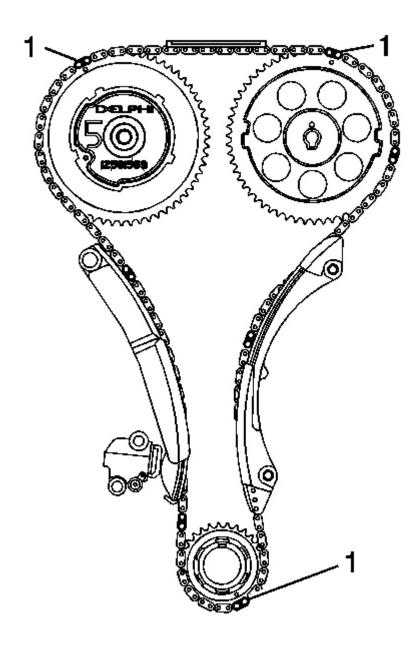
Identifying Chain Alignment Links Courtesy of GENERAL MOTORS CORP.
